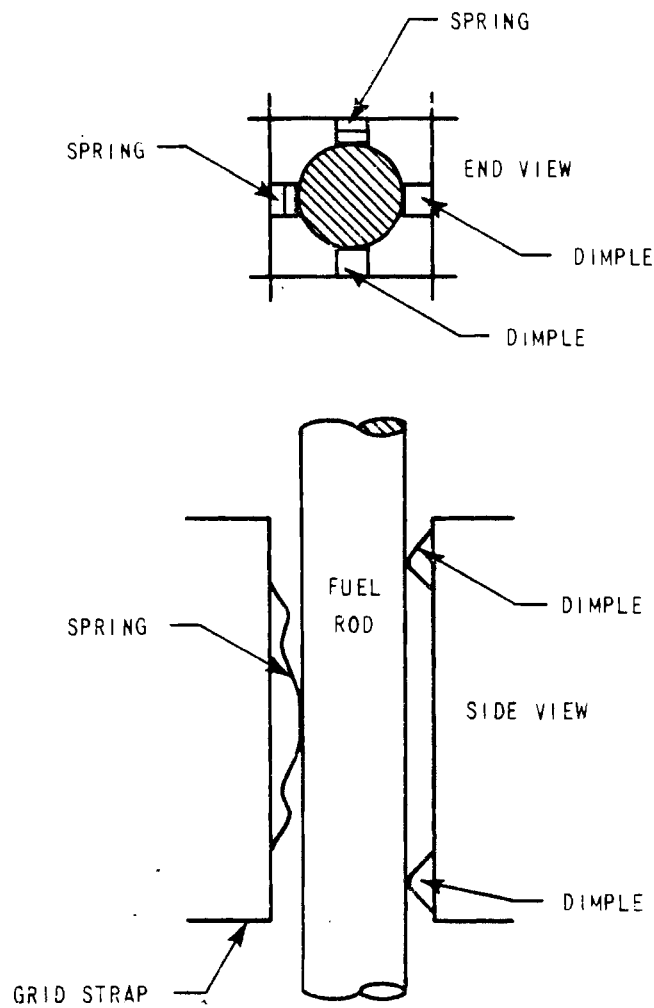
Typical Spring and Dimple Support of Fuel Rod in Fuel Assembly Grid (Westinghouse Fuel Bundles)
